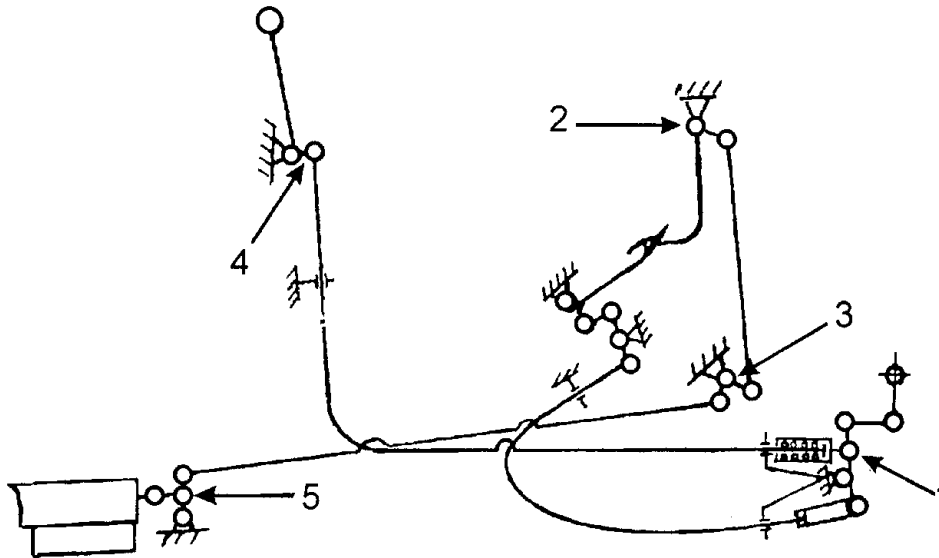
Brake and Throttle Control Linkage Fittings
